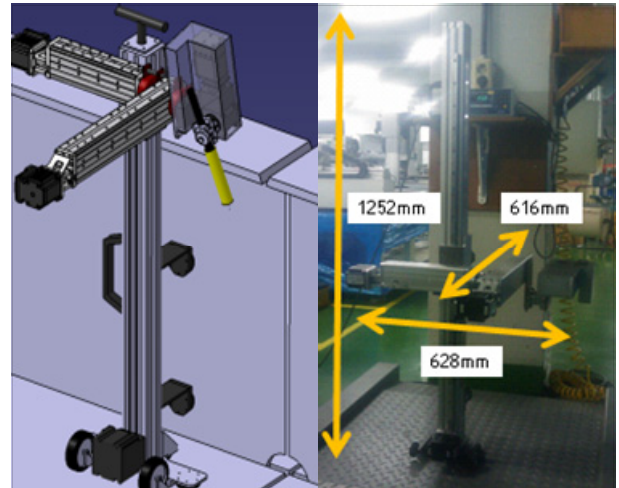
A portable type welding robot for butt welding is under development
